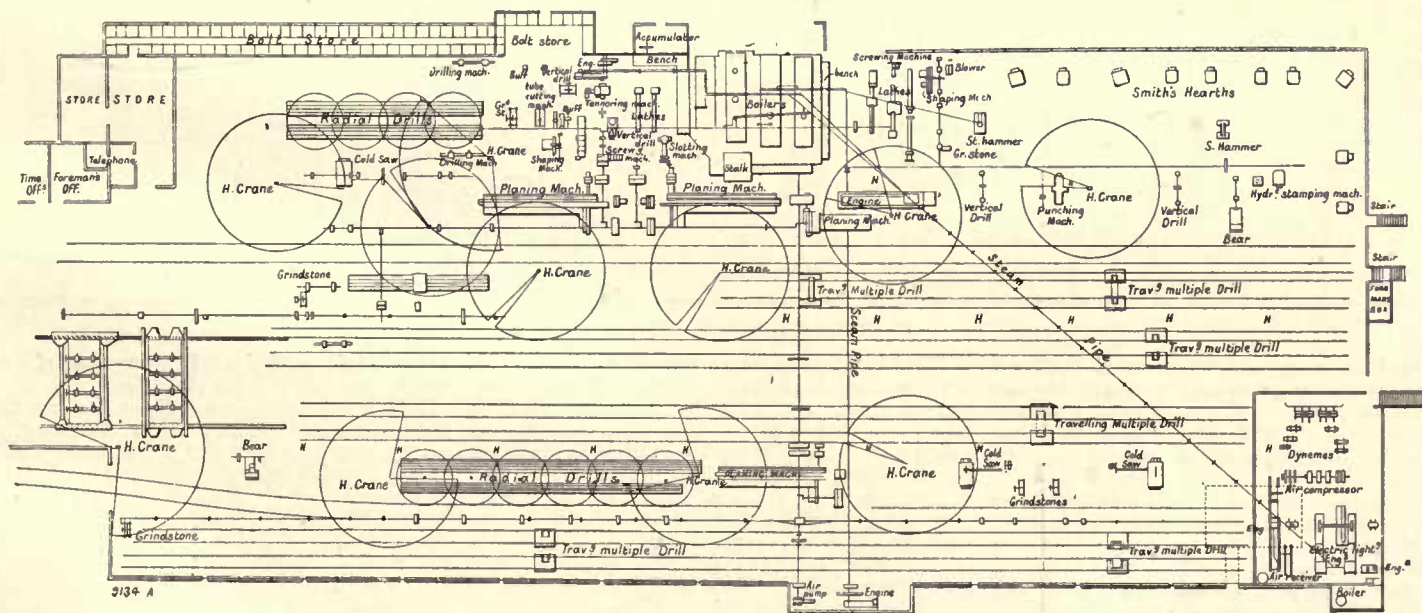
PLAN OF NO. 1 DRILL SHED.
